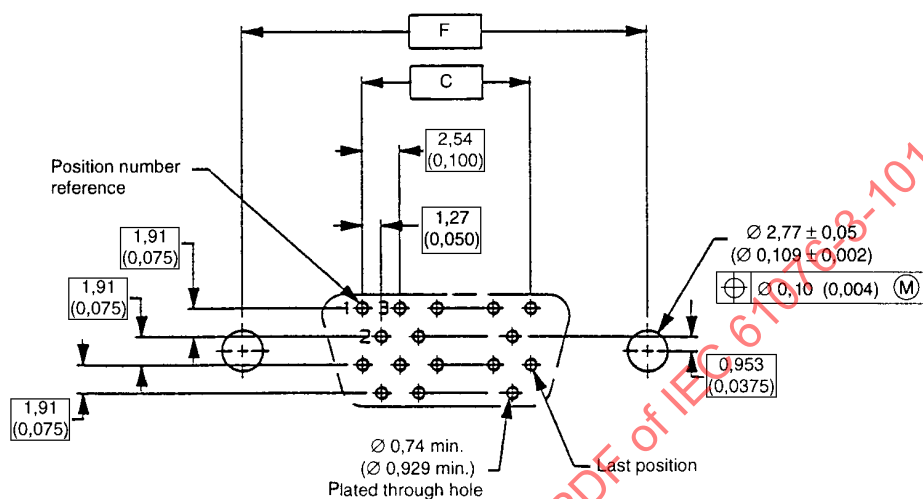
Detail for 10, 26, 38 and 50 positions, connector side of board
